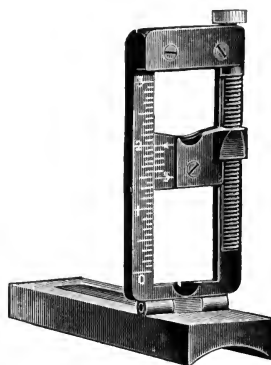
VIEW SHOWING SLIDE WITH "V" AND LINE.
